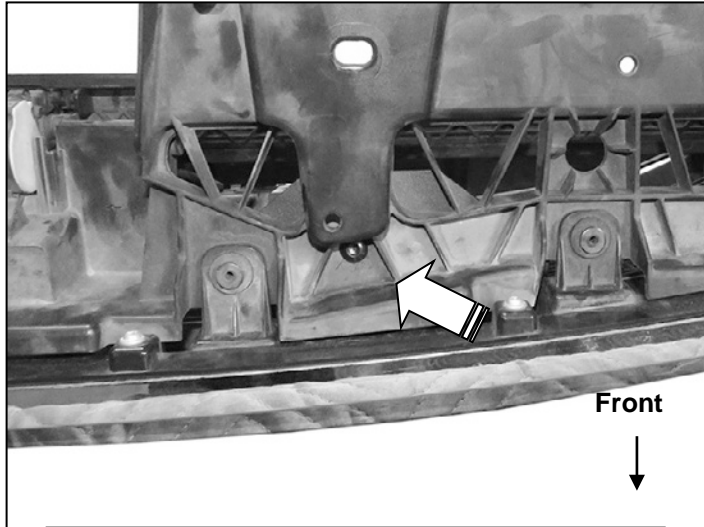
Shutter assembly in back of grille. Remove center lock (arrow) to disassemble driver/left side of shutter assembly
